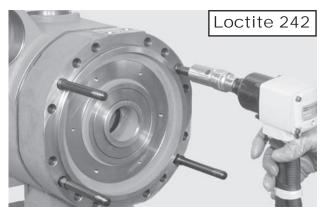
Insert the screws and tighten them alternately. Lock the cylinder.
